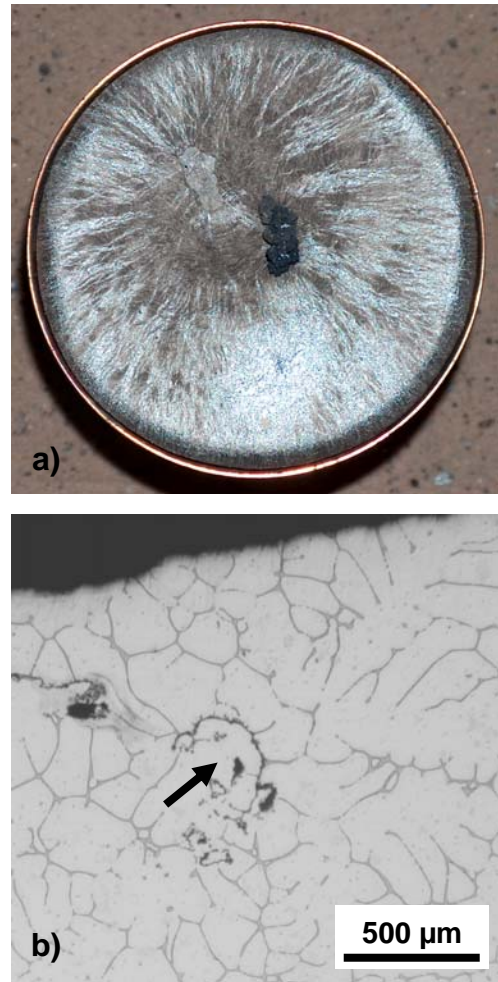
a) Photograph of the as-solidified top surface of a sample of AM-HP2 cast in air and b) an optical photomicrograph near the ‘free’ surface of a section through the diameter of the casting shown in (a) and showing a very limited extent of oxidation.
